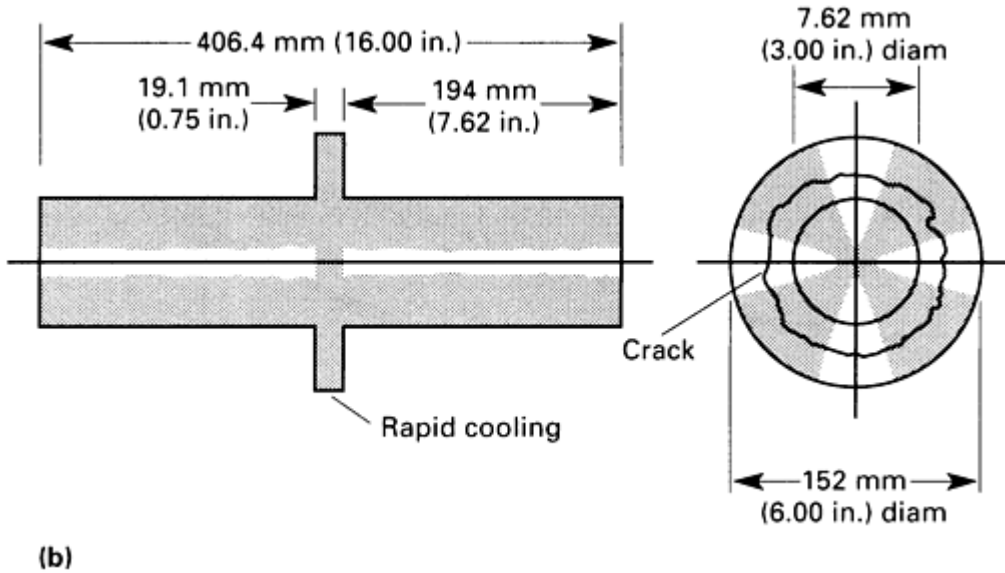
(b) The design of this steel flange on this shaft will cause the flange to crack during quenching. Source: Ref 23
